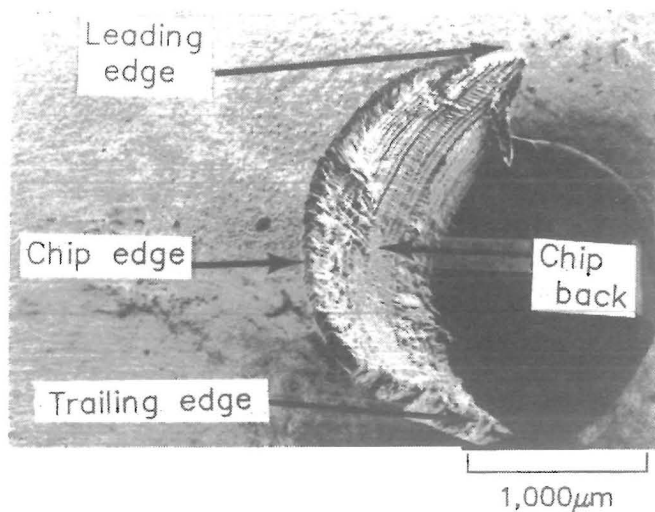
Machining chip. Thin, pointed tip is focus of cut initiation. Broad, flat end is point at which cutting edge left work piece. Note taper from chip beginning to chip ending.
